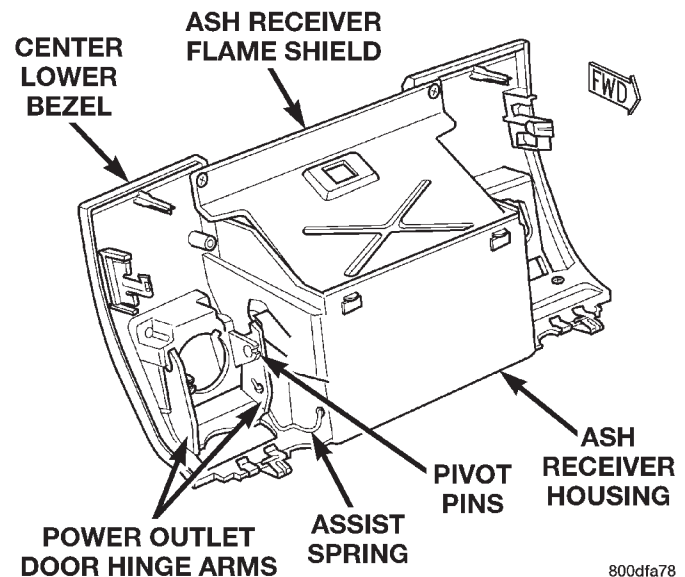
Instrument Panel Power Outlet Door Remove/Install
